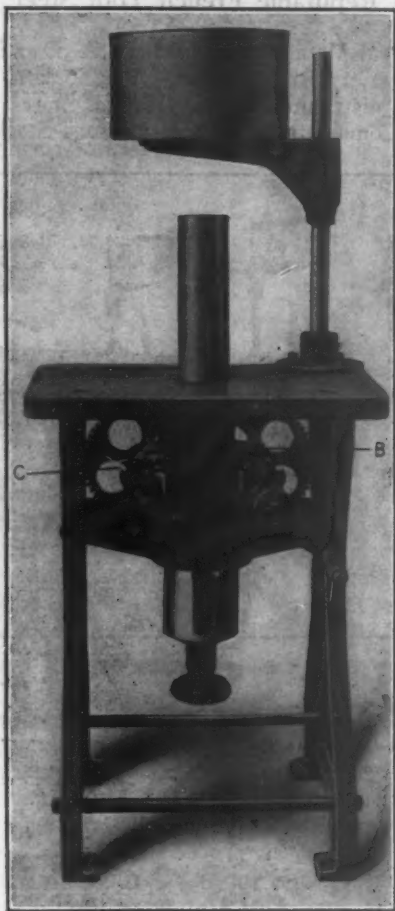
The New Wadsworth Core Machine Made by the Falls Rivet & Machine Company, Cuyahoga Falls, Ohio.
